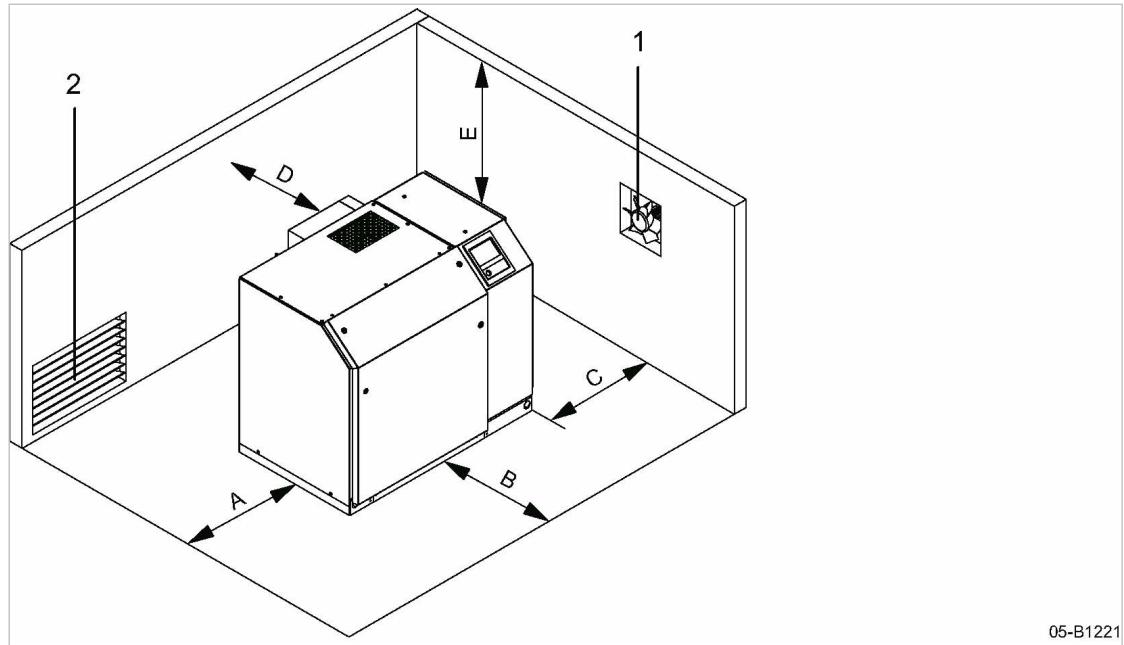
Recommended positioning of the machine, minimum dimensions [in.]
